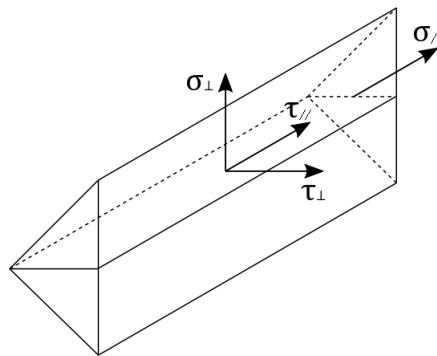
Stresses on the throat section of a fillet weld
